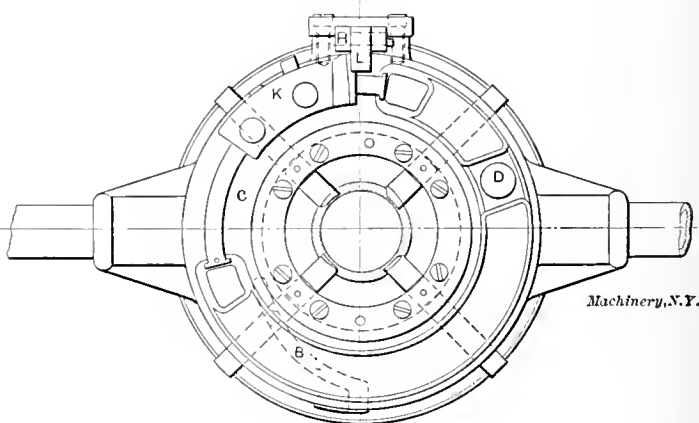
Front View of the Buckeye Die-stock, showing Cam Plate, Adjusting Dog and Stop, and Cut-off Attachment.
